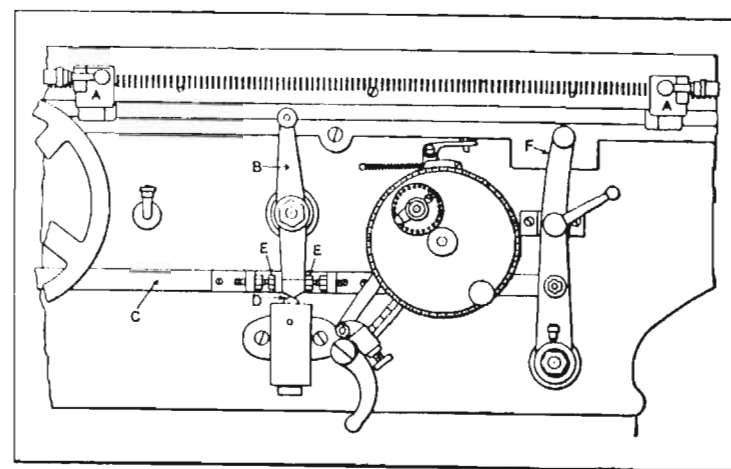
Spring and Beveled Plunger Control for Reversing Clutch
